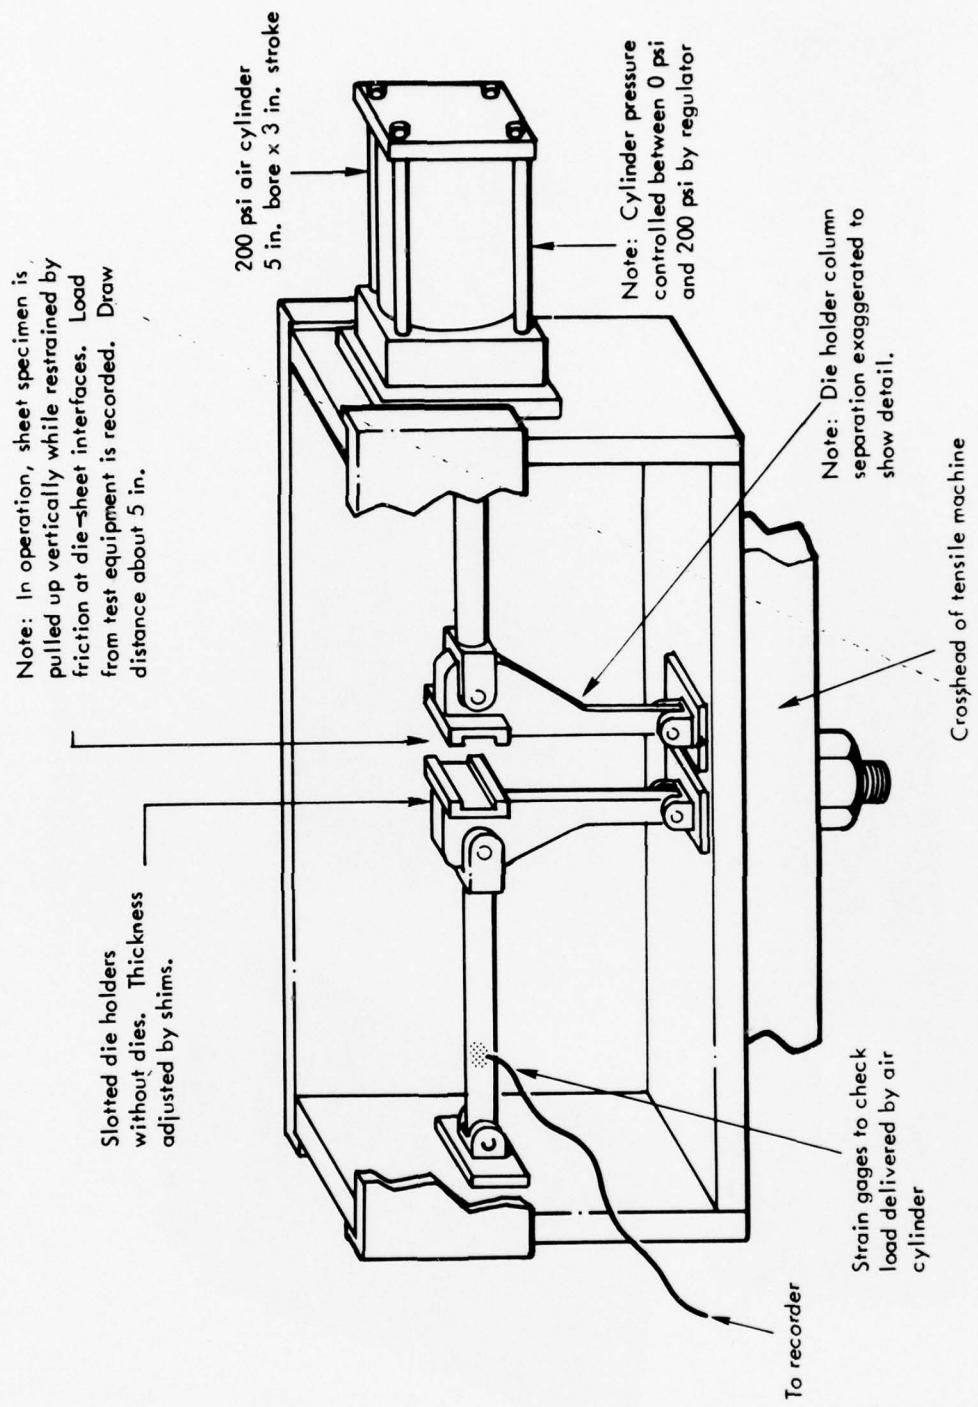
Schematic Drawing of the Variable-Die-Pressure Strip Draw Apparatus
